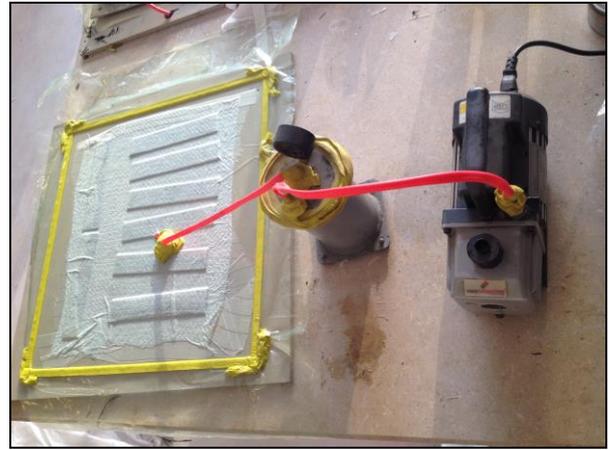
Experimental set up for coating using hand layup method followed by vacuum assisted resin pressing technique
